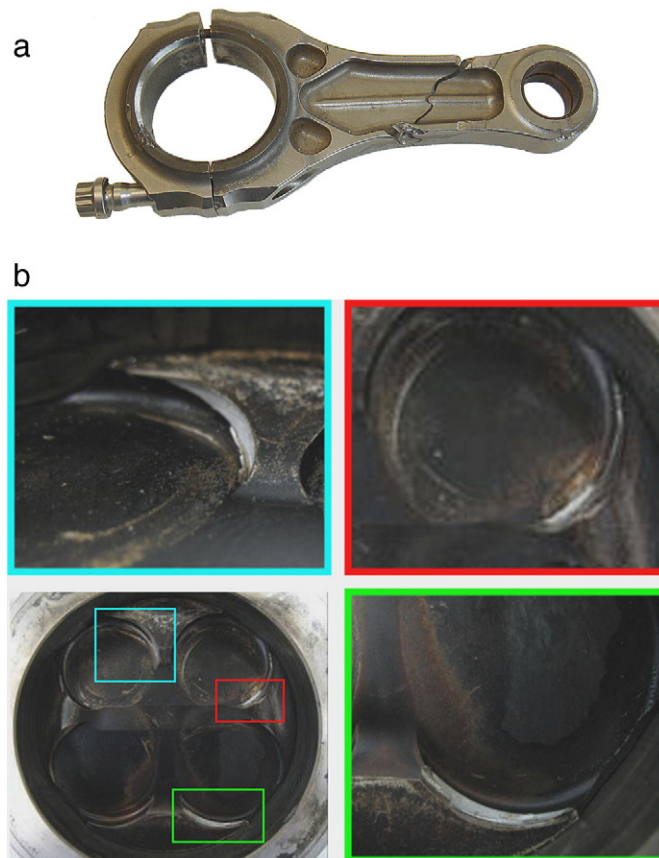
Unusual 45° fatigue crack in the con-rod shank (a); contact between the piston and the valves due to torsional deflection of the con-rod (b).
